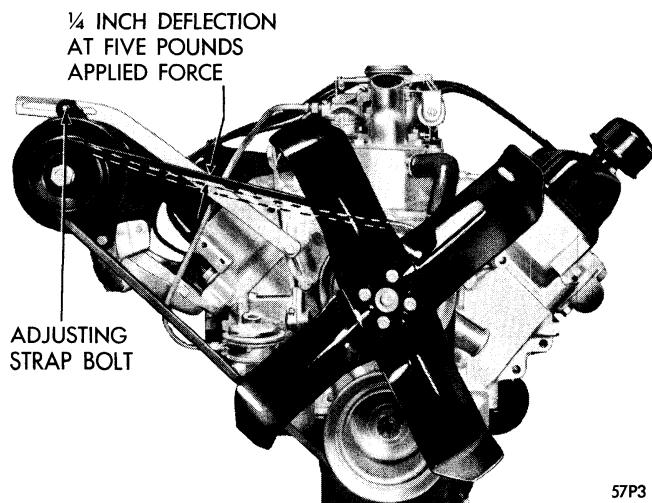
Checking Belt Tension with Straight Edge V-8 Engine (Typical of 6 Cylinder Engine)
